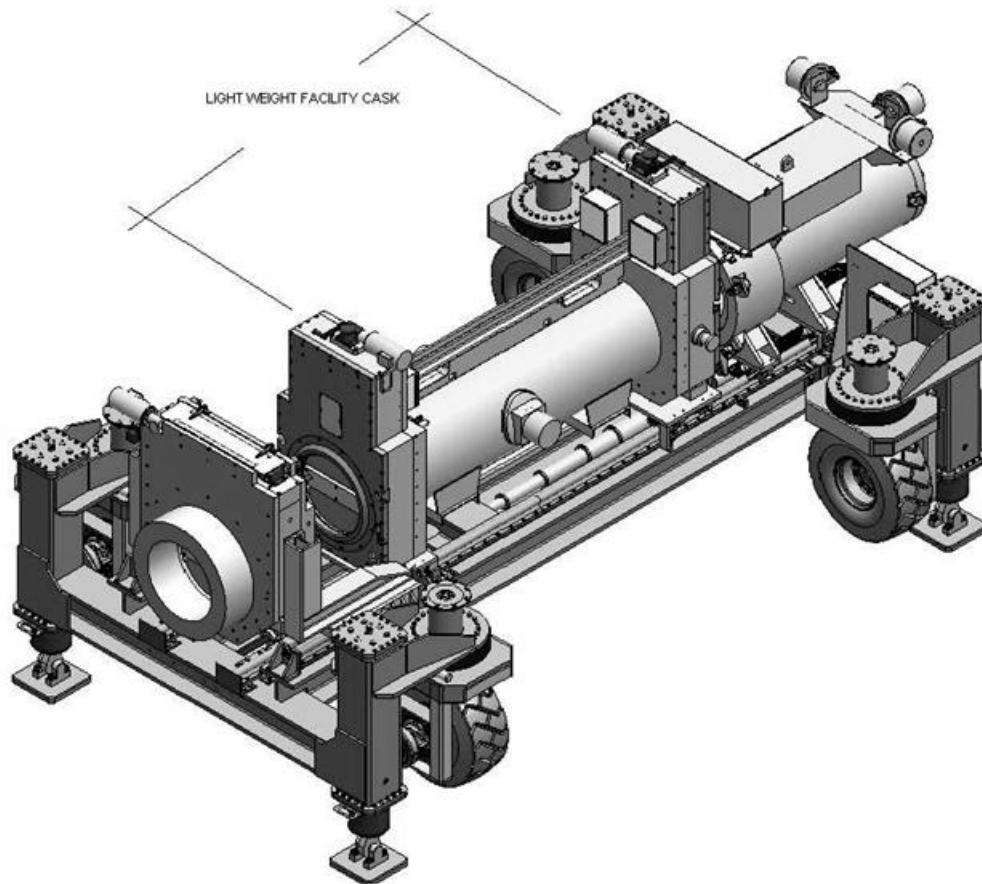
Horizontal Emplacement Machine with Light Weight Facility Cask
